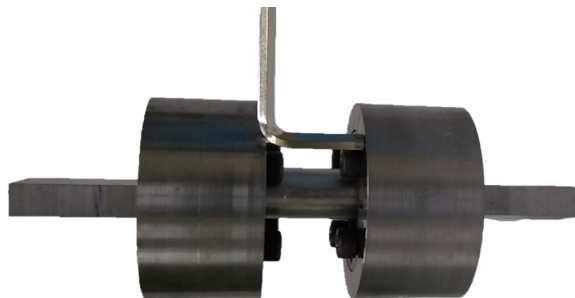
Specimens with a gauge length of 30 mm cannot properly inserted or removed due to the limited space for a standard or ball-end Allen key.
